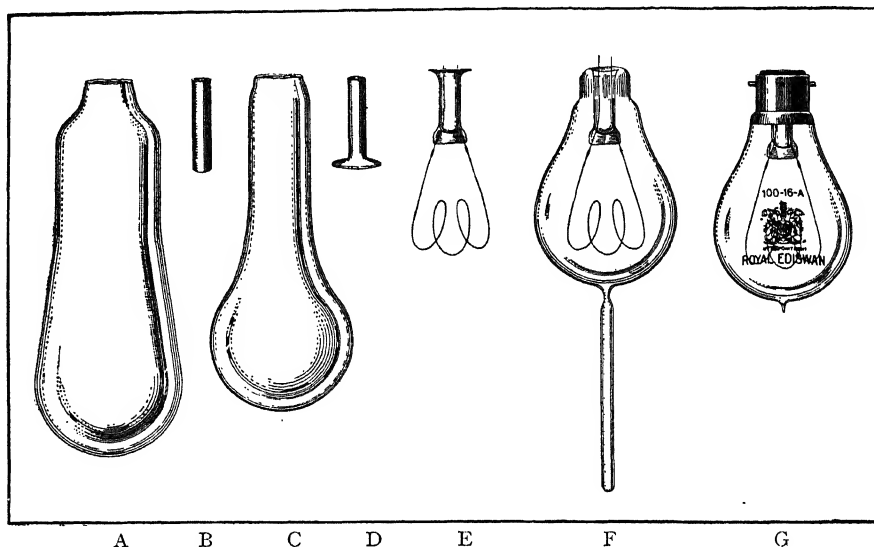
Stages in the Manufacture of a Carbon Lamp.
